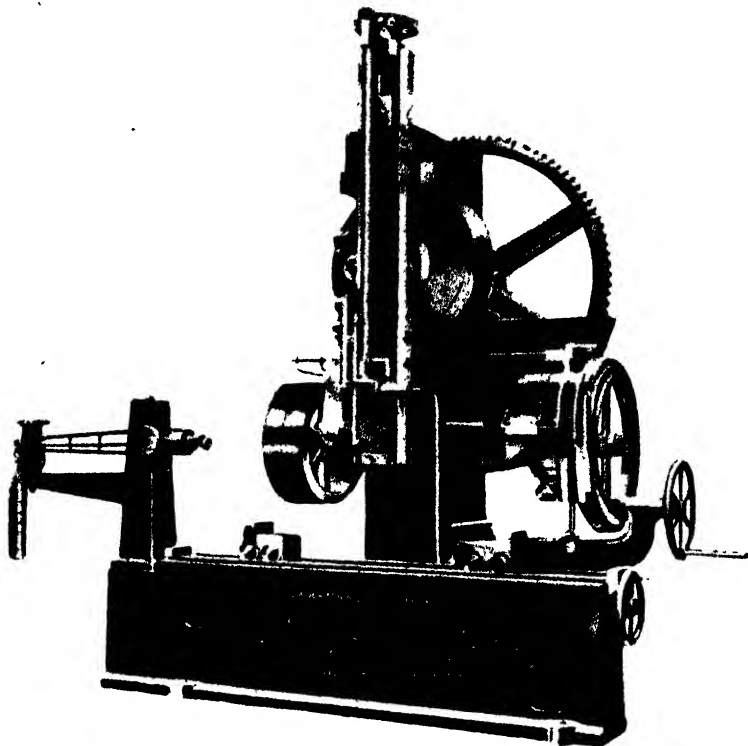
THE BUCKTON VIBRATORY SPRING TESTING MACHINE
